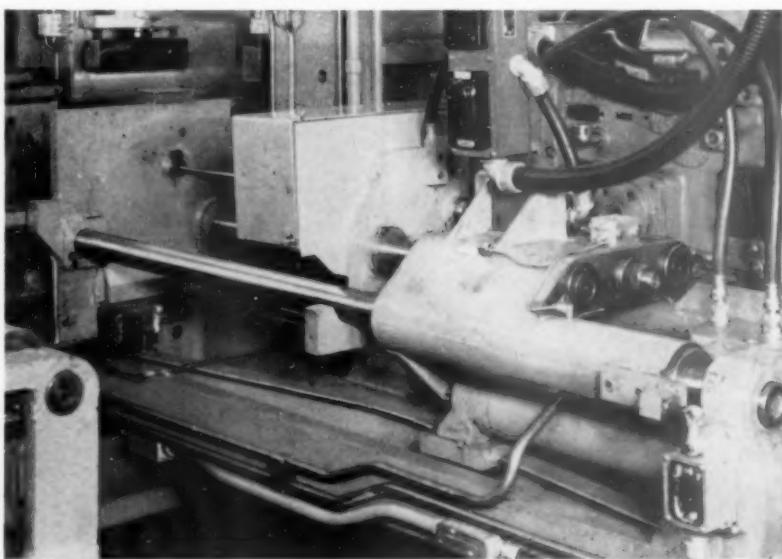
Two inspection stations are built into this 27-station transfer machine to automatically check the depth of holes drilled, tapped and reamed in the ends of a six-cylinder engine block. The machine is stopped at the end of a cycle if any defects are found.
